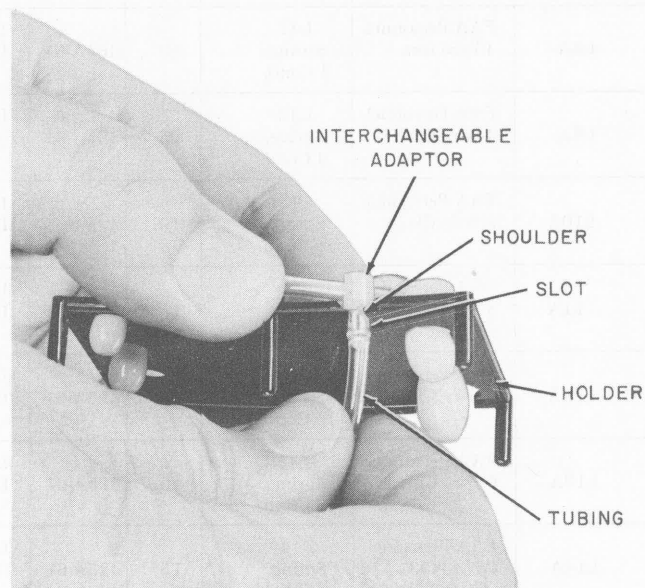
Adaptor in Holder Slot for Removal of Earpiece Assembly
